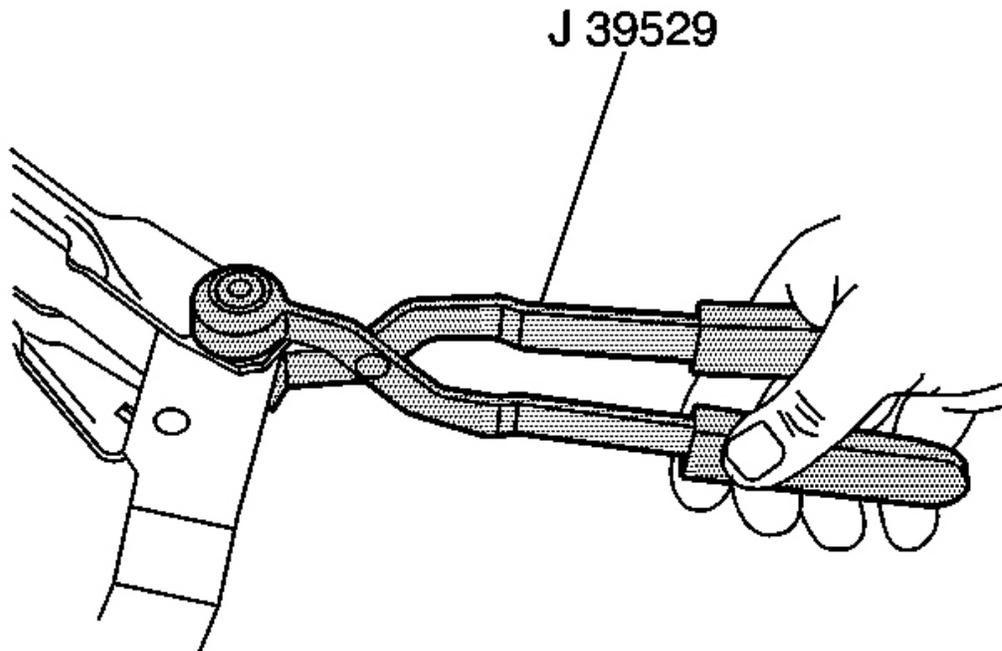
Wiper Transmission To Wiper Motor Crank Arm
